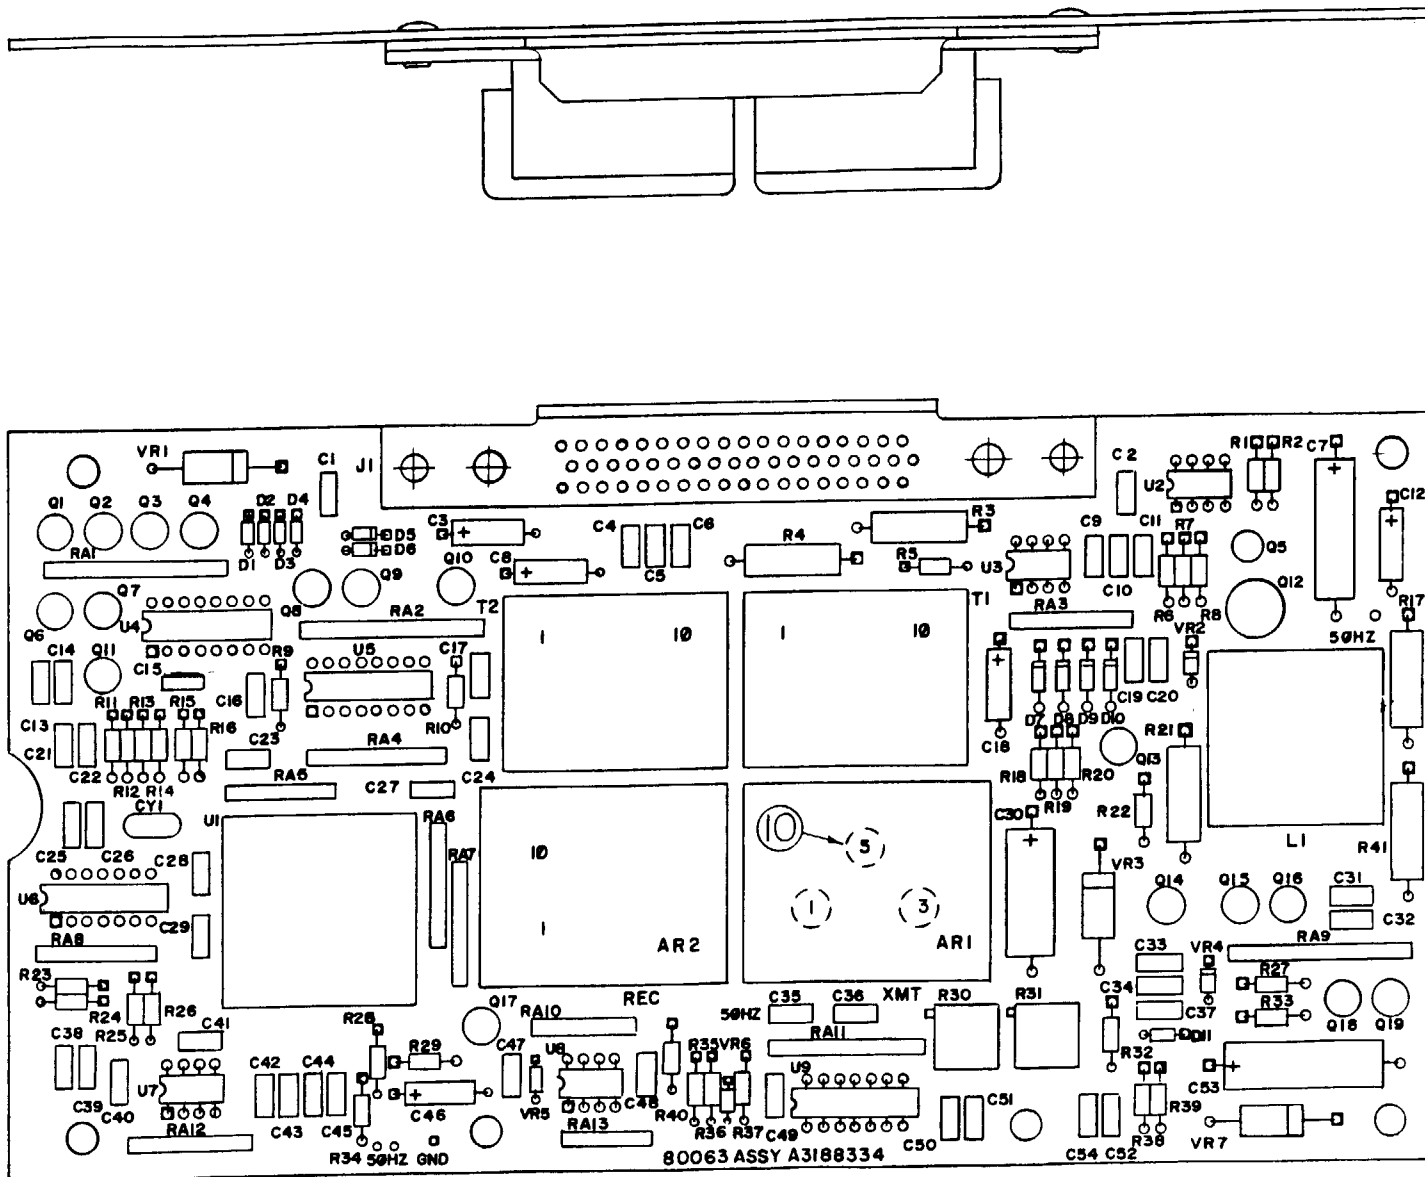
Circuit Card Assembly TA-838A/TT (sheet 1 of 2)
